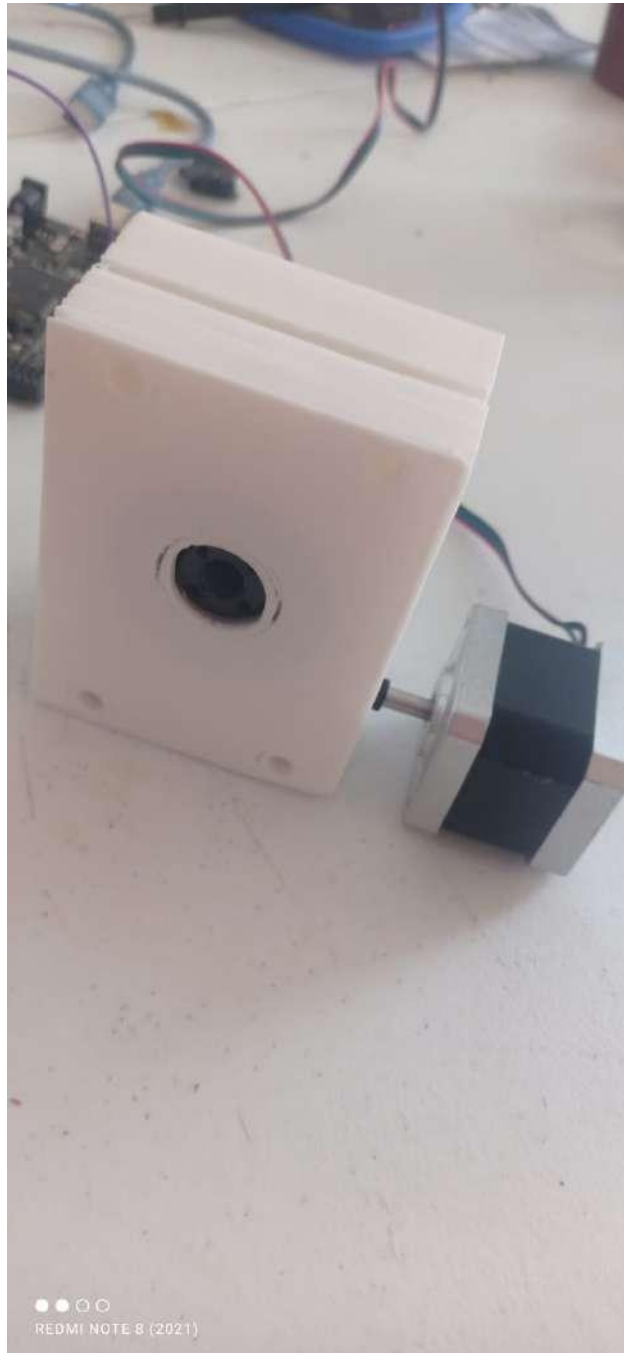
Final assembly of the worm-gear drive with stepper. Source: own
